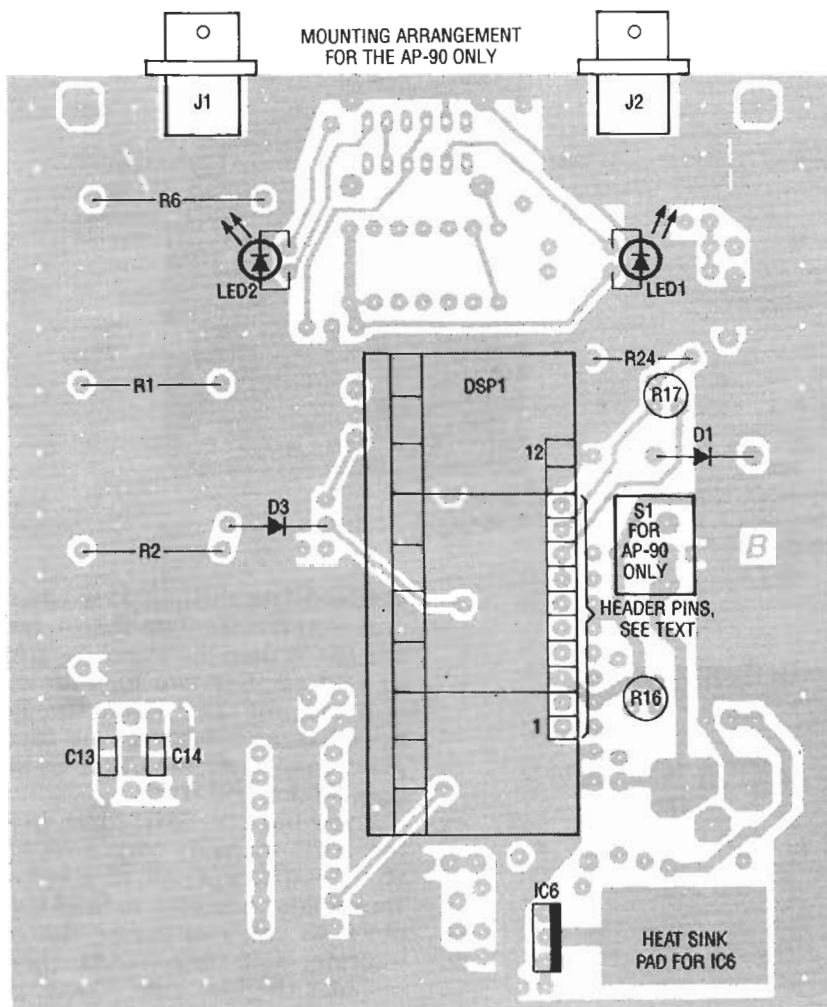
PARTS PLACEMENT DIAGRAM FOR side B of the PC board. In the cabinet-mounted version, the header pins protrude from side A to holes 1–10 of DSP1 on side B; the separator is on side A. In the panel-mounted version, the header pins are inserted into side B; their other ends go to holes 1–10 on DSP1, with the separator on side B.
